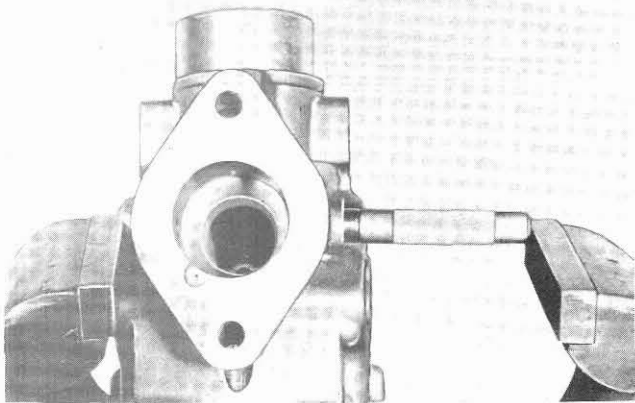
Pressing New Needle-Bearing Into Carburetor Body
